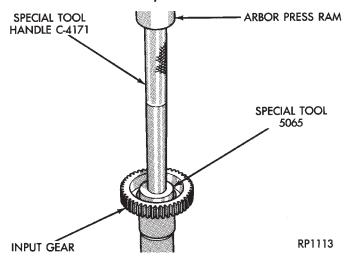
Installing Mainshaft Pilot Bearing In Input Gear
